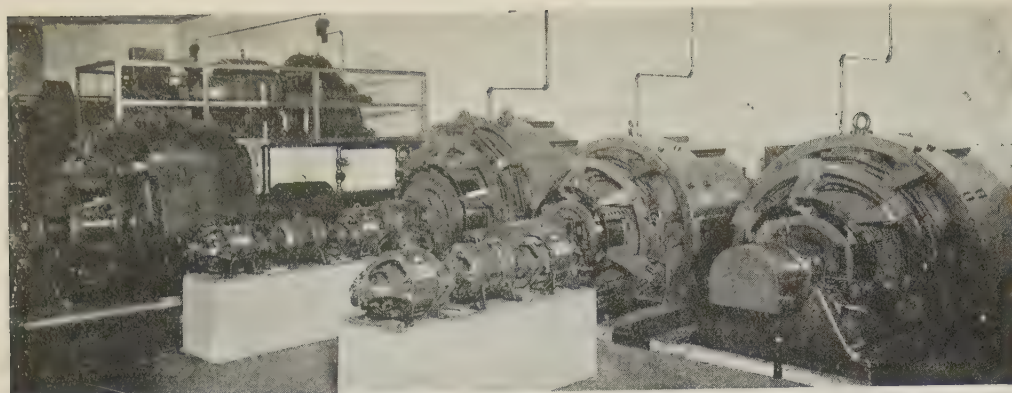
Typical installation of d-c adjustable speed motors for high speed tandem mill drive
